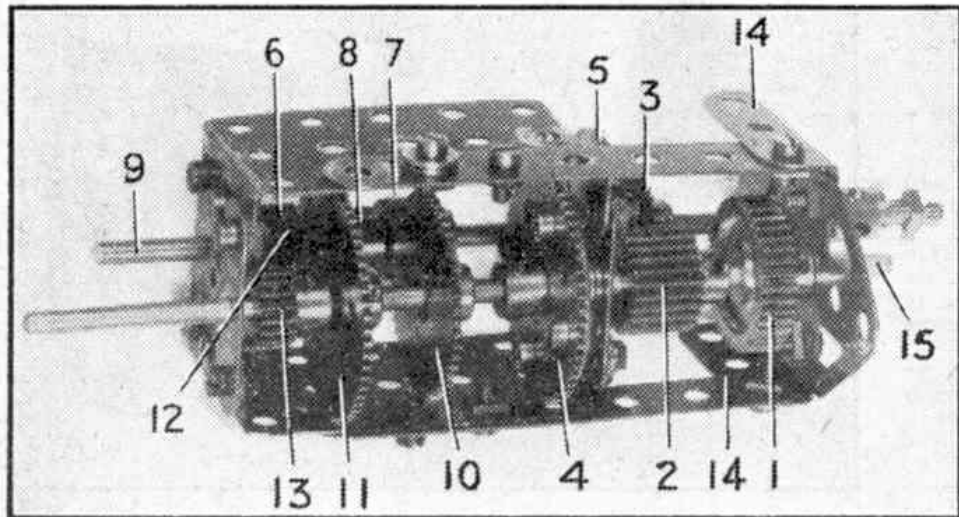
A four-speed and reverse gear-box built by Roland Brown, Oakham.
